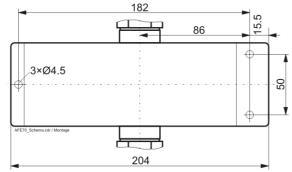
Schematic illustration of the mounting holes of the Automatic Purging Units Series F-BO-AFE70-2
